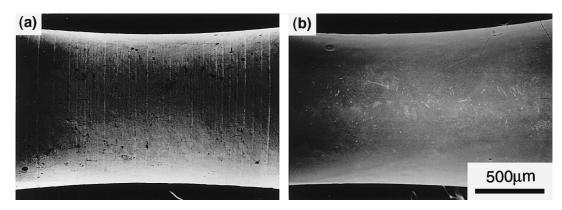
Specimen surface in the gage section before testing. (a) As-machined specimen, (b) electropolished specimen.
